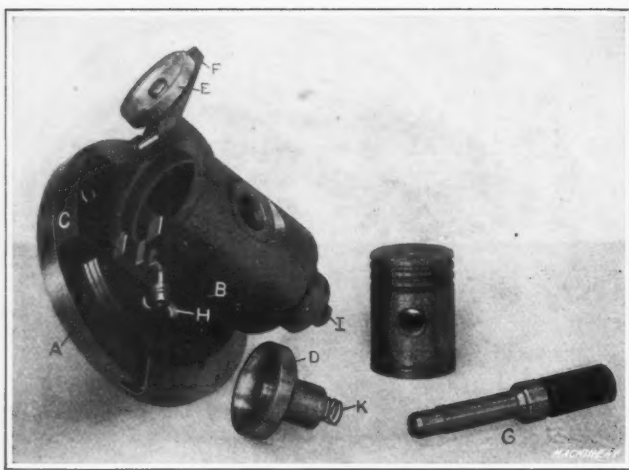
Special Fixture for holding Gas Engine Pistons for grinding Wrist-pin Holes
